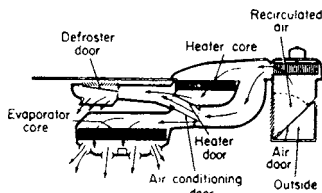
Combined heater and air conditioner. (Chevrolet.)
